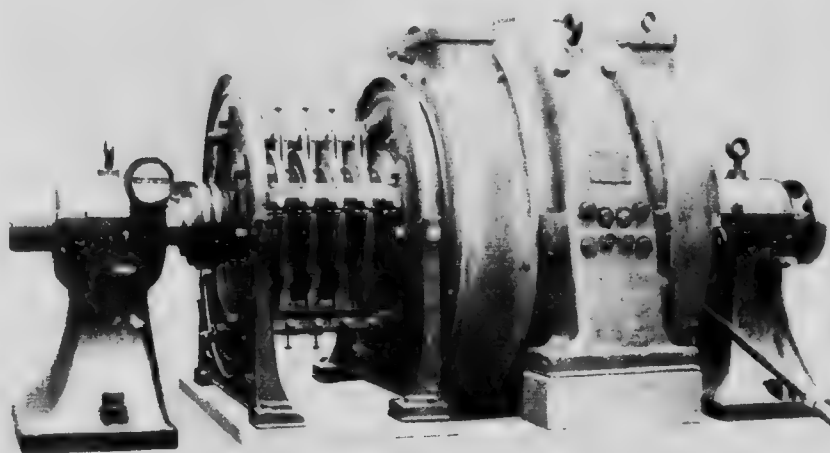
Showing Mounting of Westinghouse Brush Gear and Dynamo.
